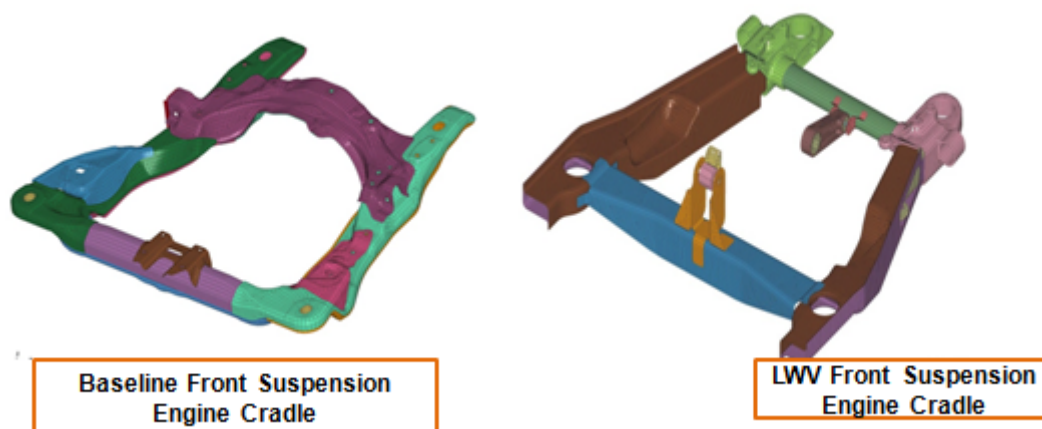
Front Suspension Engine Cradle – Baseline and LWV Design
